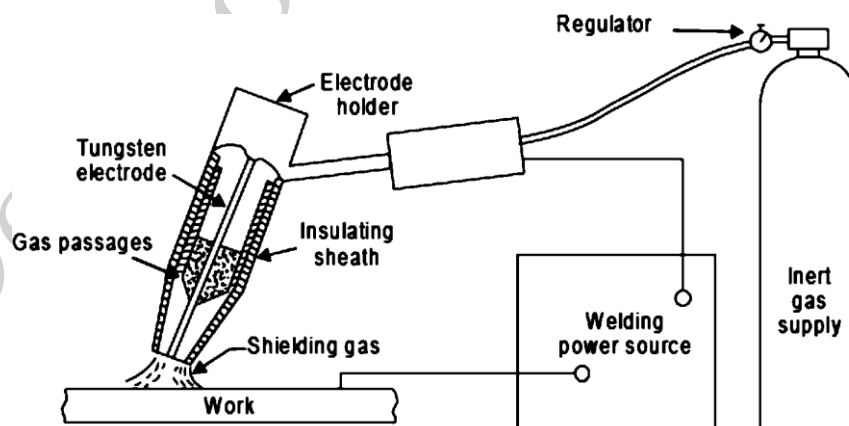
Gas Tungsten Arc Welding (GTAW) or Tungsten Inert Gas Welding (TIG)
